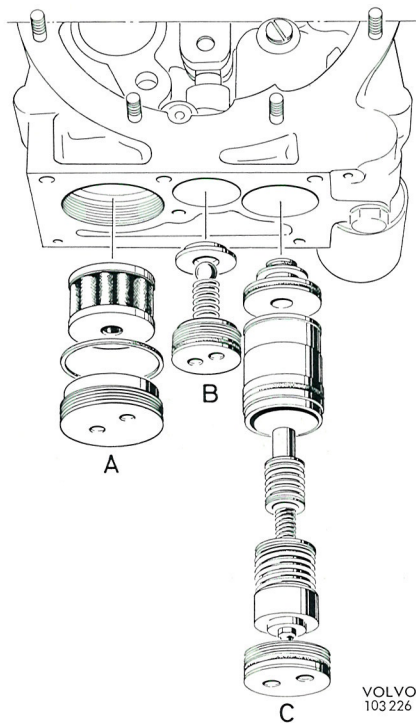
Fitting the fine filter, oil pump check valve and relief valve
